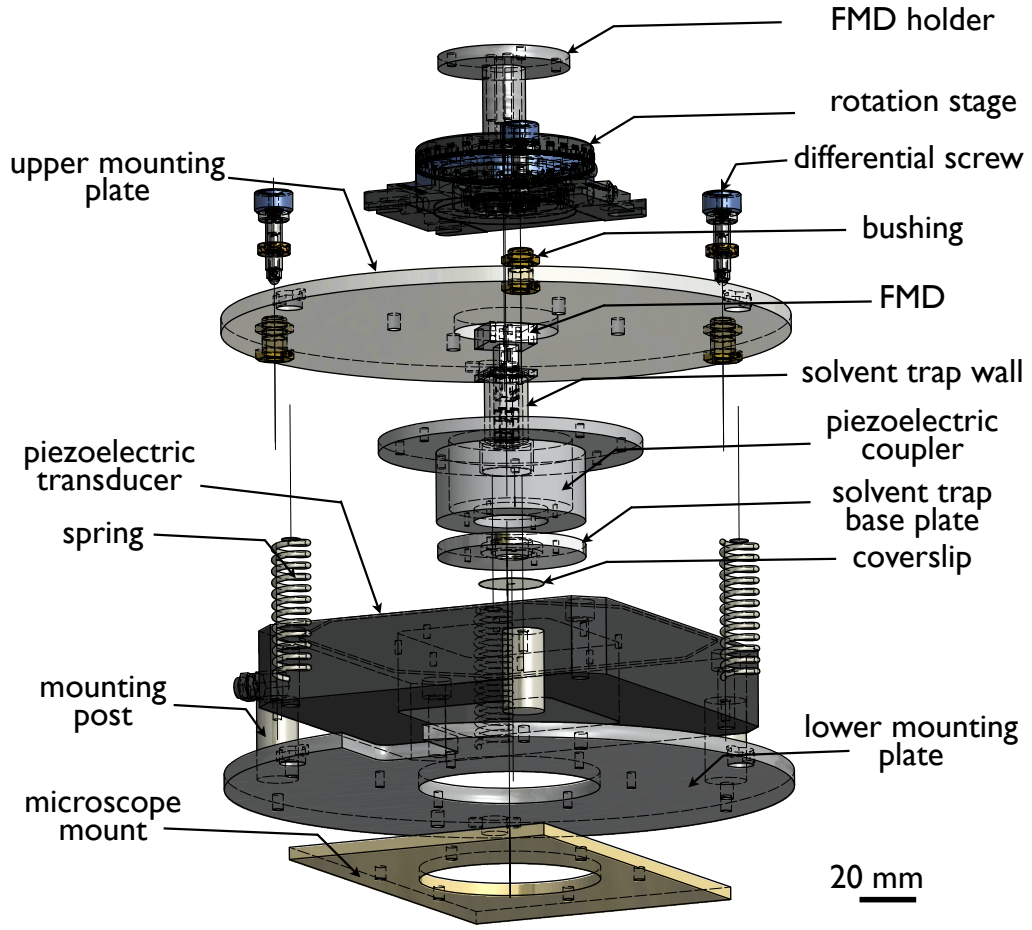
Exploded view drawing of the confocal rheoscope.
